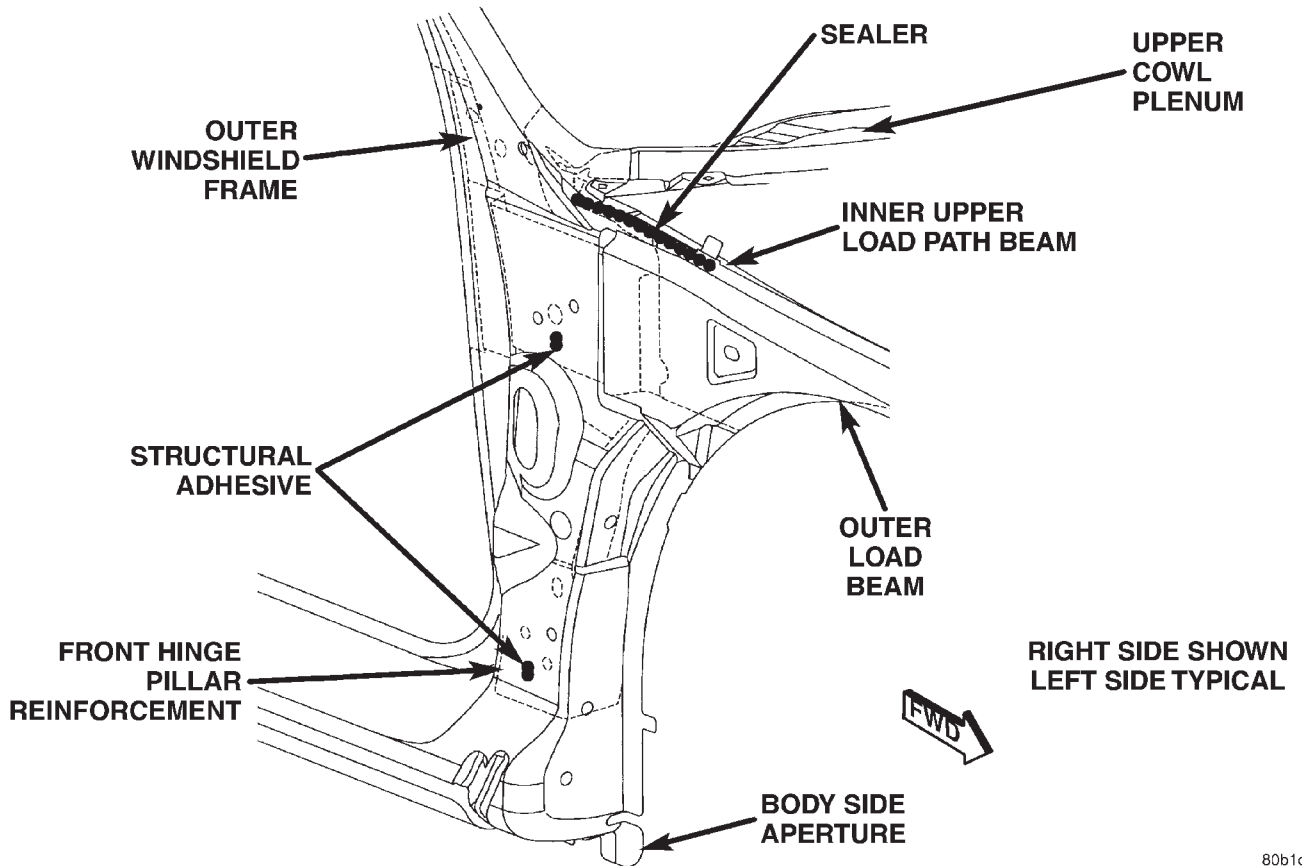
INNER & OUTER UPPER LOAD PATH BEAMS, HINGE PILLAR REINFORCEMENT
